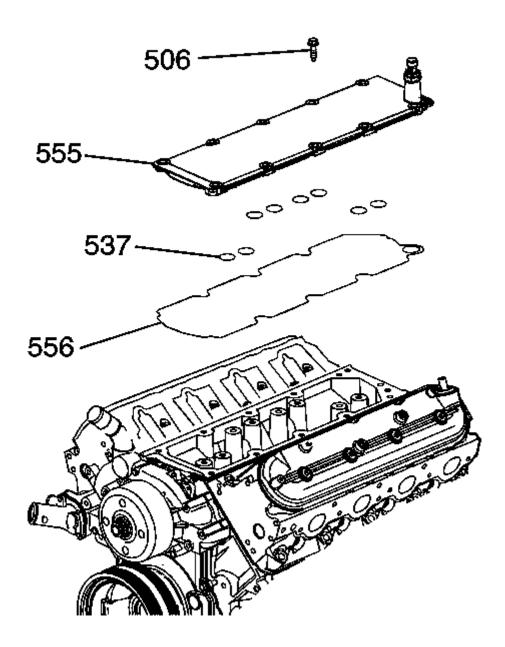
Removing/Installing Engine Valley Cover Courtesy of GENERAL MOTORS CORP.
